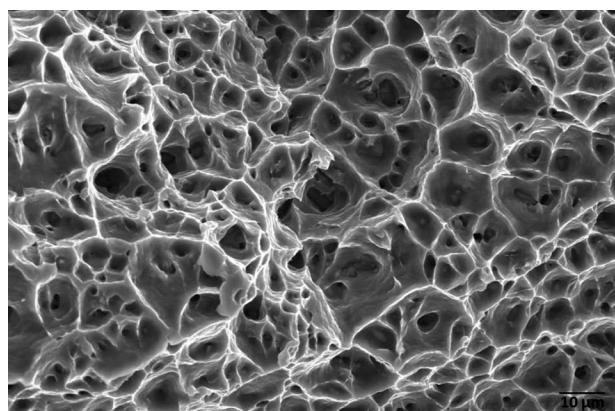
High magnified image of the fracture surface shown in Fig. 158 indicating dimples
